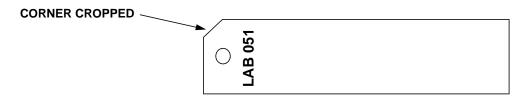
PLATE HARDNESS TEST SPECIMEN
